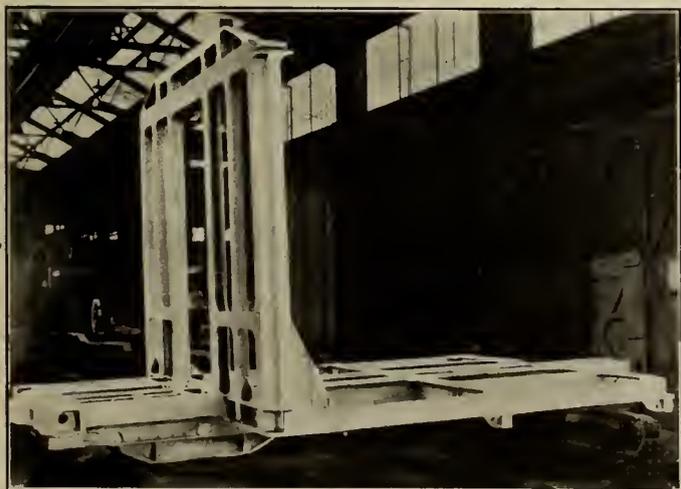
One-piece Casting of End of Car Underframe, including Foundation for Car Platform.
